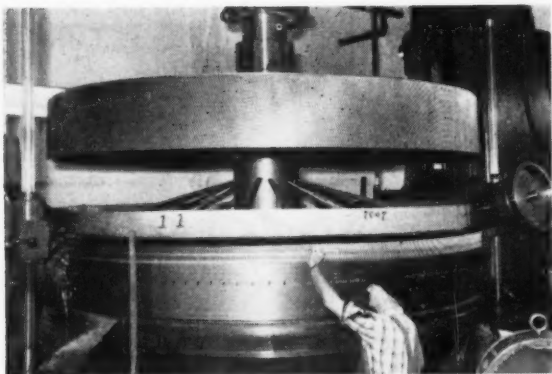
Hobbing of large bull gears for ship propulsion must be carried on with extreme accuracy. In this illustration teeth are completed on the upper wheel and hobbing has just been started on the lower wheel.
